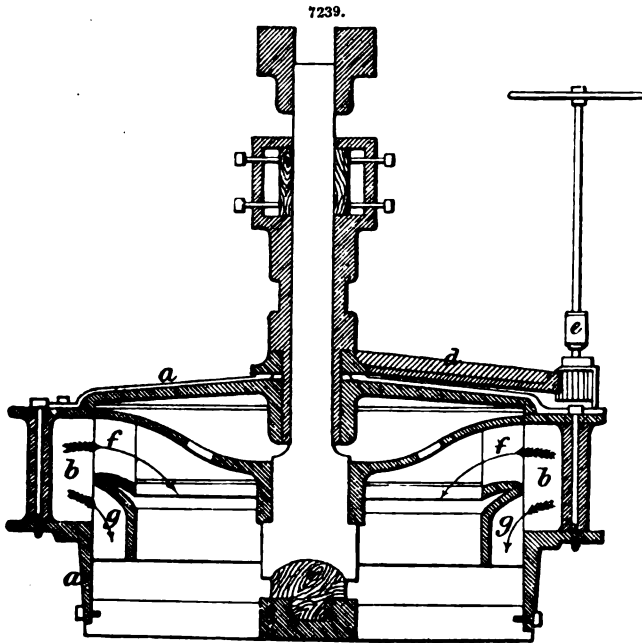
is a vertical section through the same; Fig. 7240 an elevation of wheel removed from casing; Fig. 7241 a plan showing direction of buckets, and also the guides and guide-rods; and Fig. 7242 a view of a cast-iron flume or casing. In these figures, *a* is the outer casing to which are fixed the guides *b*; *c* are the rods for regulating the opening of the guides. These rods are attached at the centre to the arm *d*, which at its outer end consists of a segment of a toothed wheel, into which is geared the pinion *e*, from which pinion a rod passes upwards to any convenient position. By these means, the guides may be easily regulated to any desired opening. *f* denotes the upper buckets, having a horizontal discharge, and *g* the lower buckets, from which the discharge is vertical. The spher-
